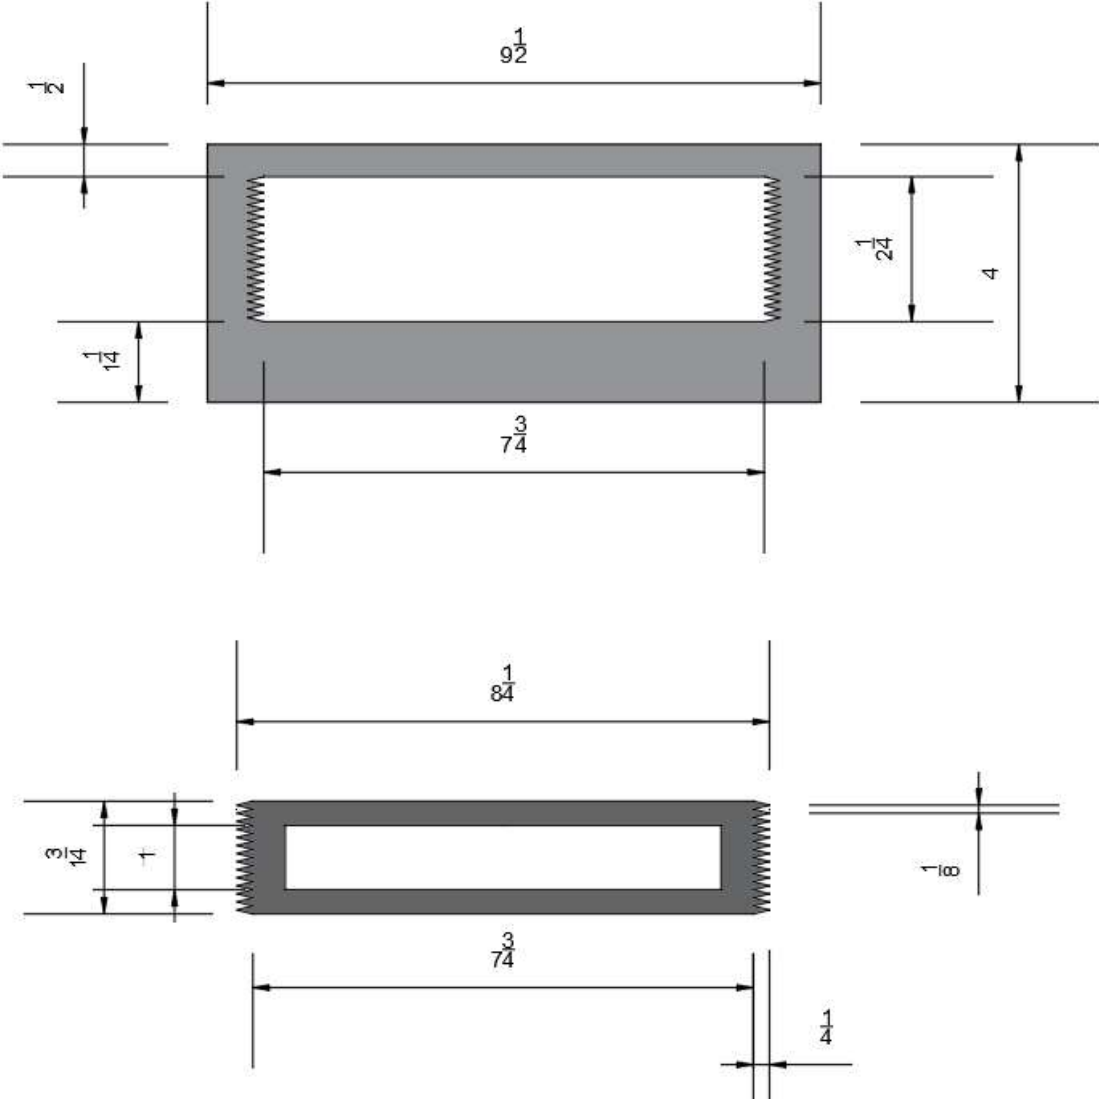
Top-View Schematic of Jig Design and the Cut-out Including Dimensions
